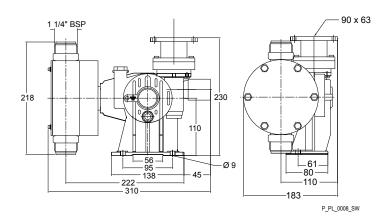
Dimensional drawing of Plasma PSMa without motor - dimensions in mm
